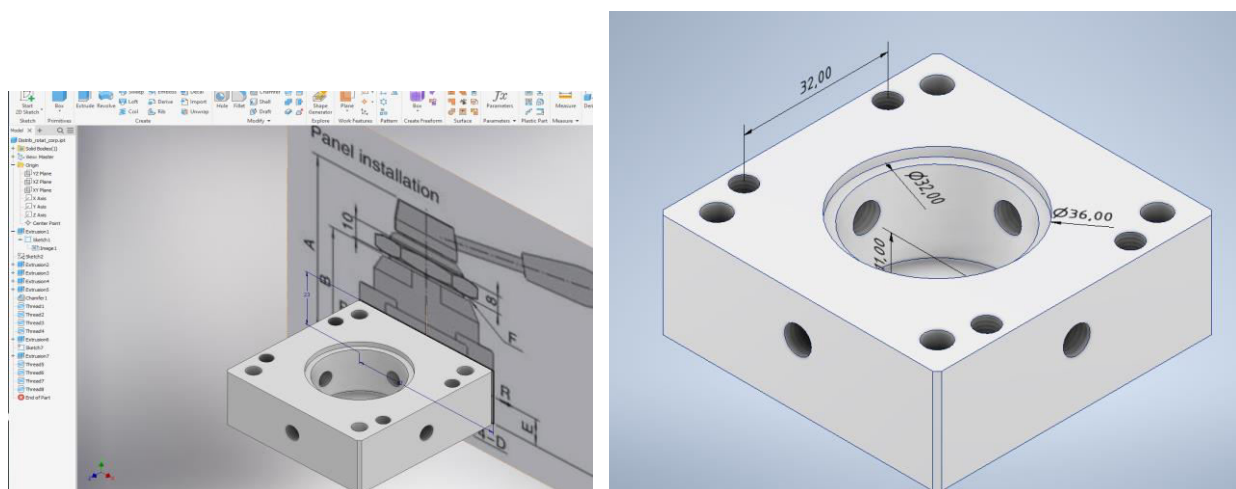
Constructive body of the valve left picture and CAD construction, right important dimensional surface
